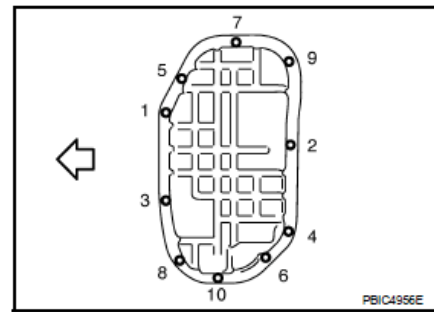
Identifying Oil Pan Mounting Bolts Tightening Sequence
